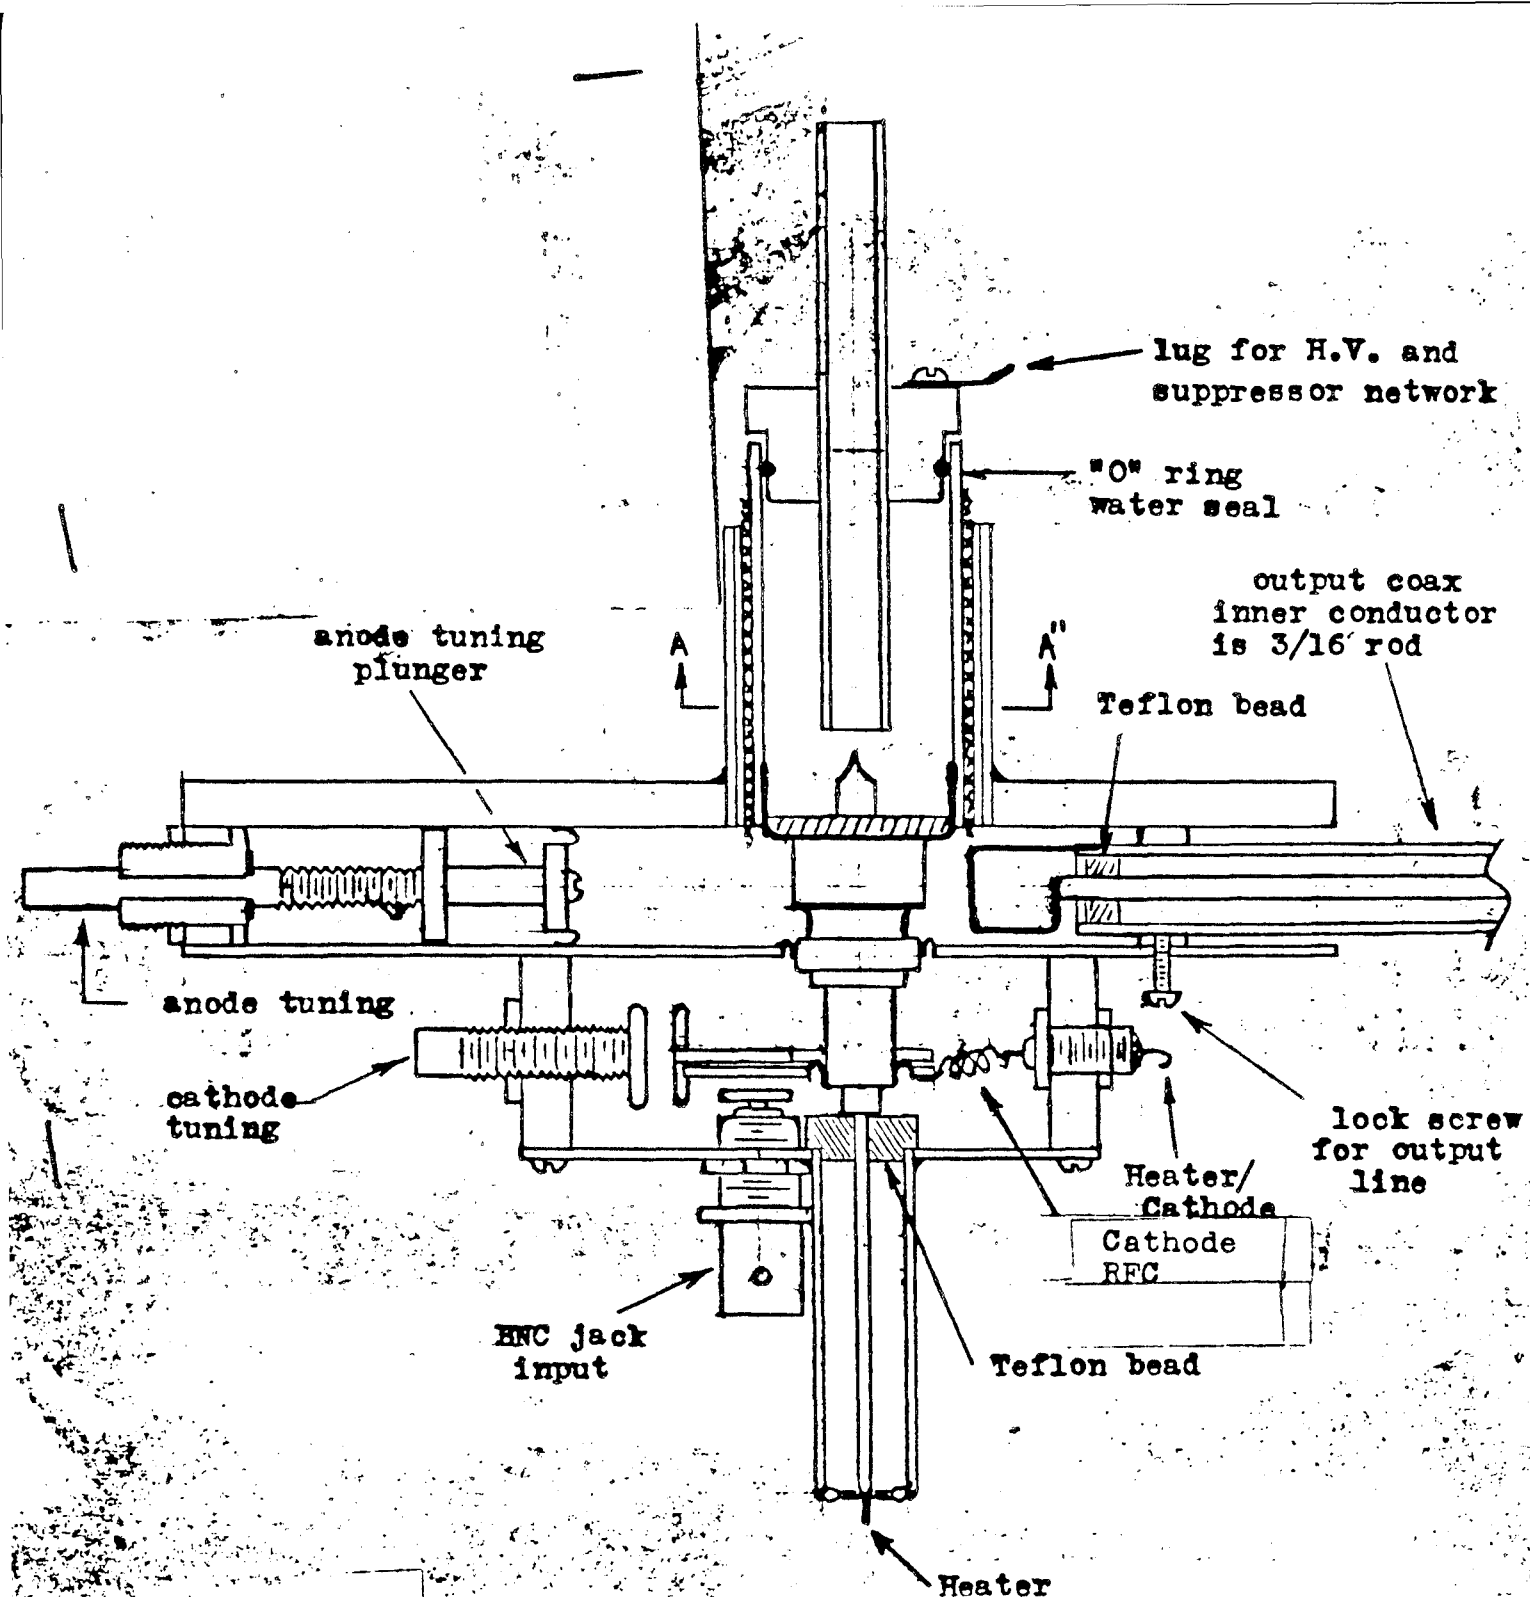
Exposed side view showing assembly details. See other drawings for dimensions. This drawing is approximately full scale.
